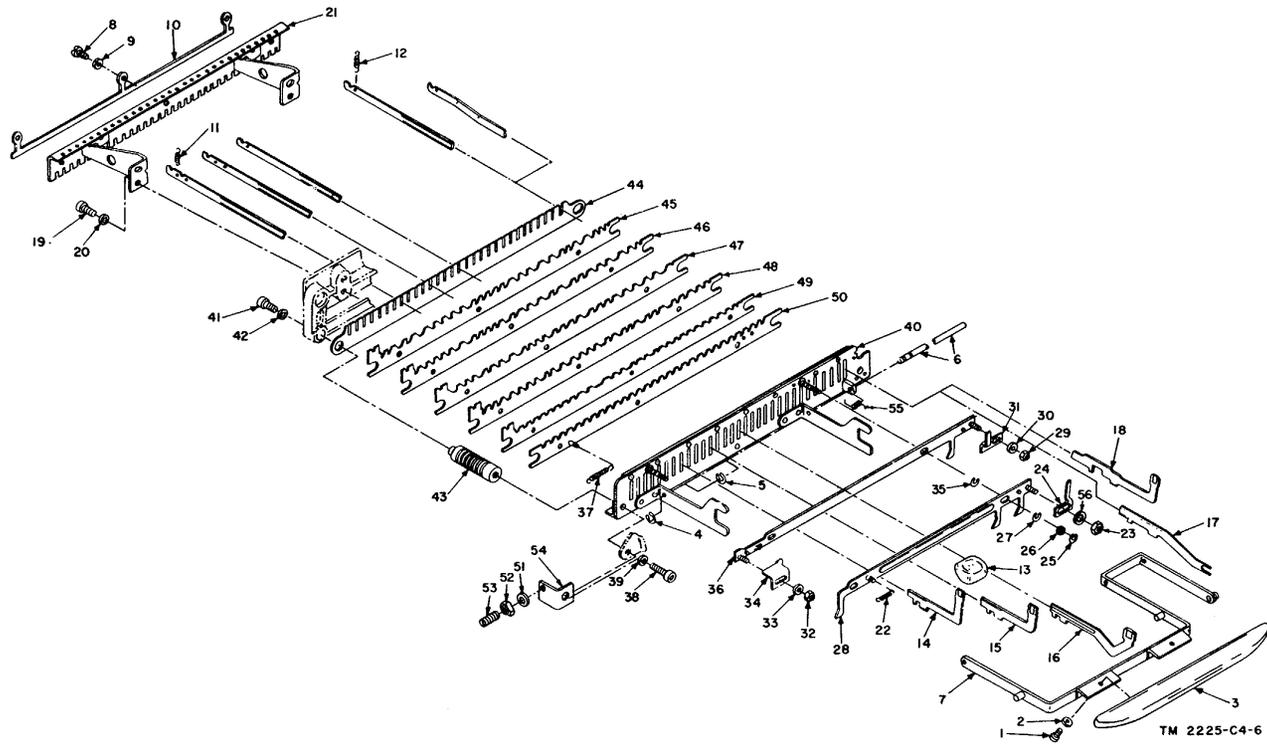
Key levers and code bars, exploded view, (TT-76B/GGC, serial Nos. 256; and above, Order No. 13931-PC-58 and subsequent procurements).
